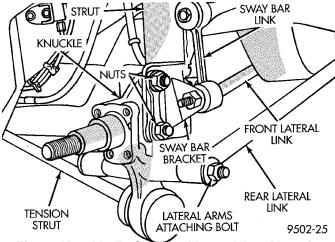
Knuckle To Strut And Lateral Arm Mounting Bolts
